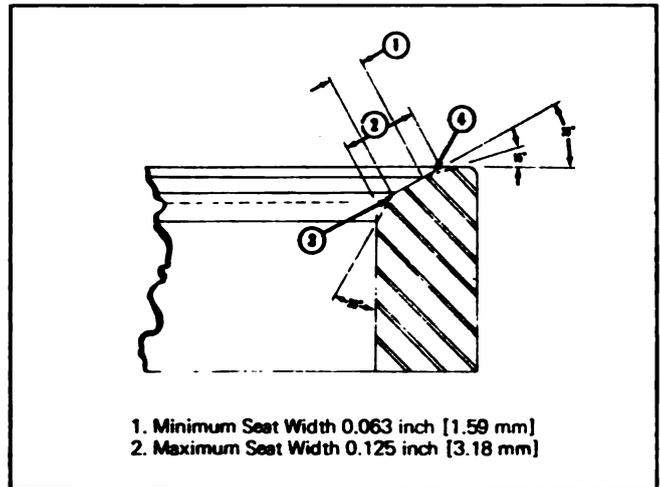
(N10228). Cross-Section Of The Valve Seat Insert.
